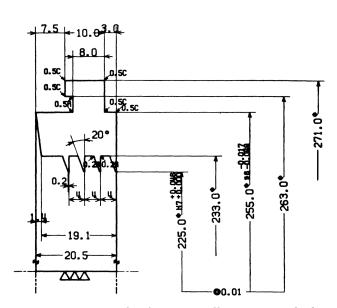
An Example of Automatically Drawn Work-Shop Drawing (Impeller Eye Labyrinth).
